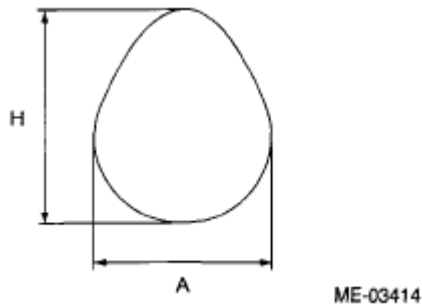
Measuring Cam Lobe Height "H" And Cam Base Circle Diameter "A"
